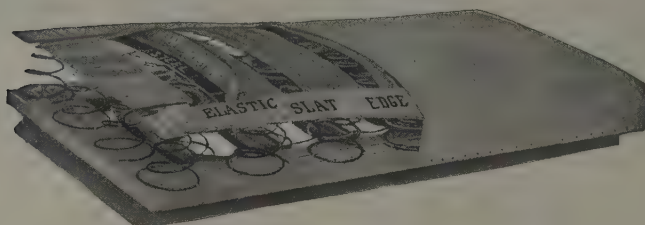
Spring Seat, Showing the Use of Slat and Webbing and the Elastic Slat Edge. Hale &amp; Kilburn Company.
